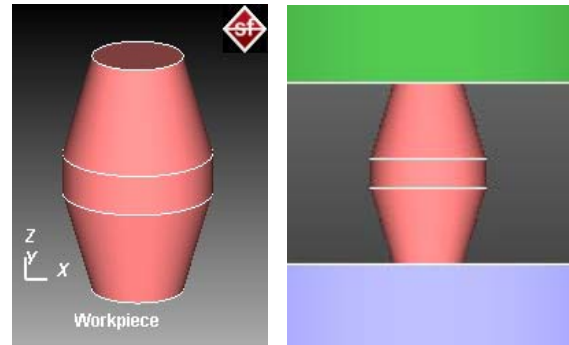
3D model – tapered workpiece and upsetting process [2]
